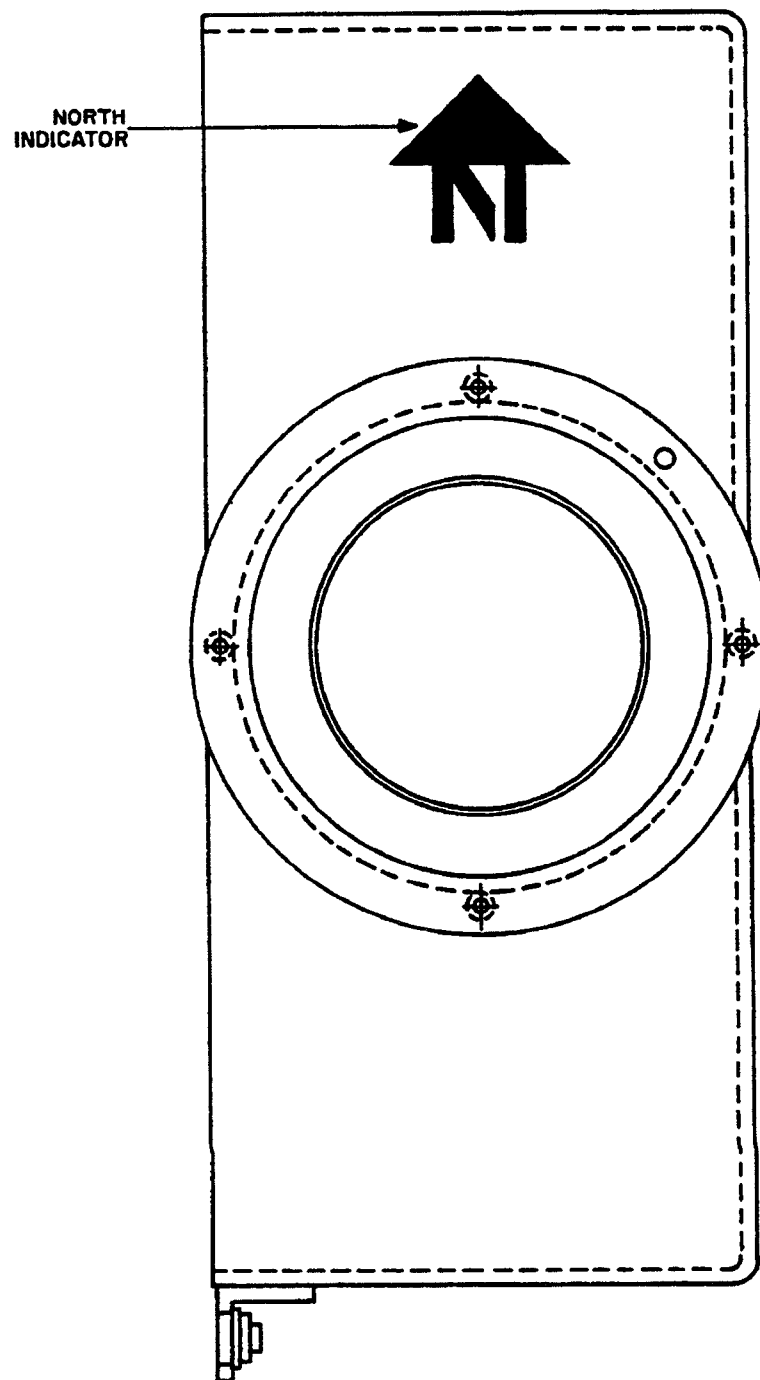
Installation of Sensor Assembly To Existing Stub Pipe
